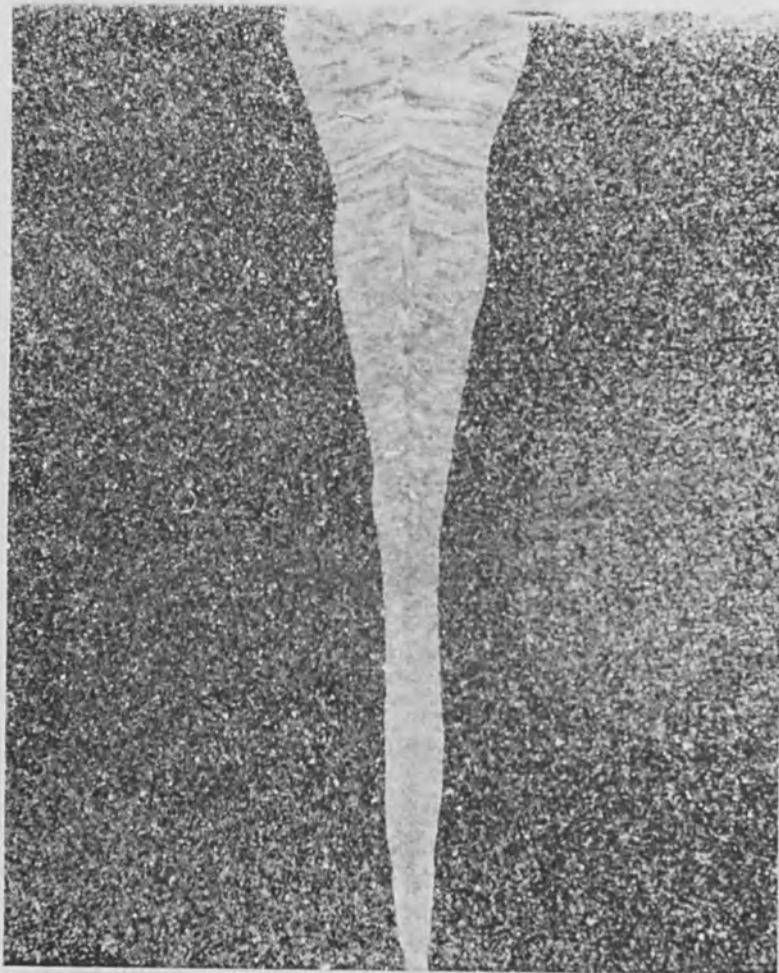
Deep Penetration Weld in 3/4 in. SS Plate Made by Axial Beam Hollow Cathode; 3 kW, 20 in./min.
